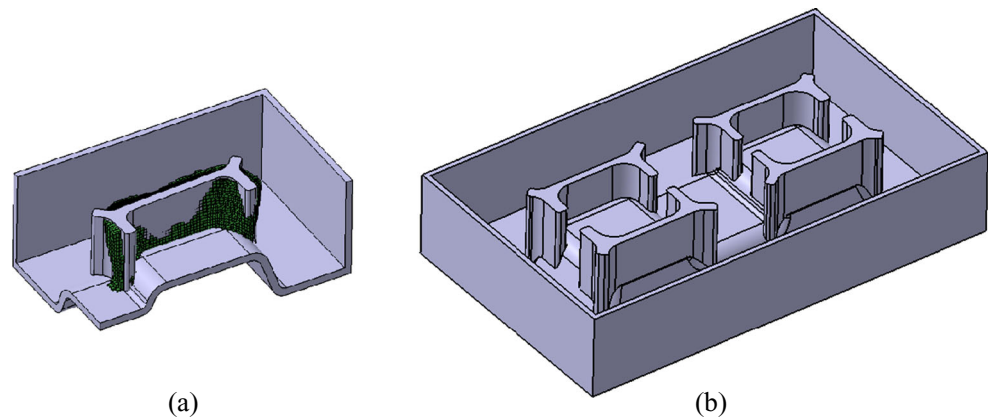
Standard die structure: a bottom view, b 3-D reverse view
